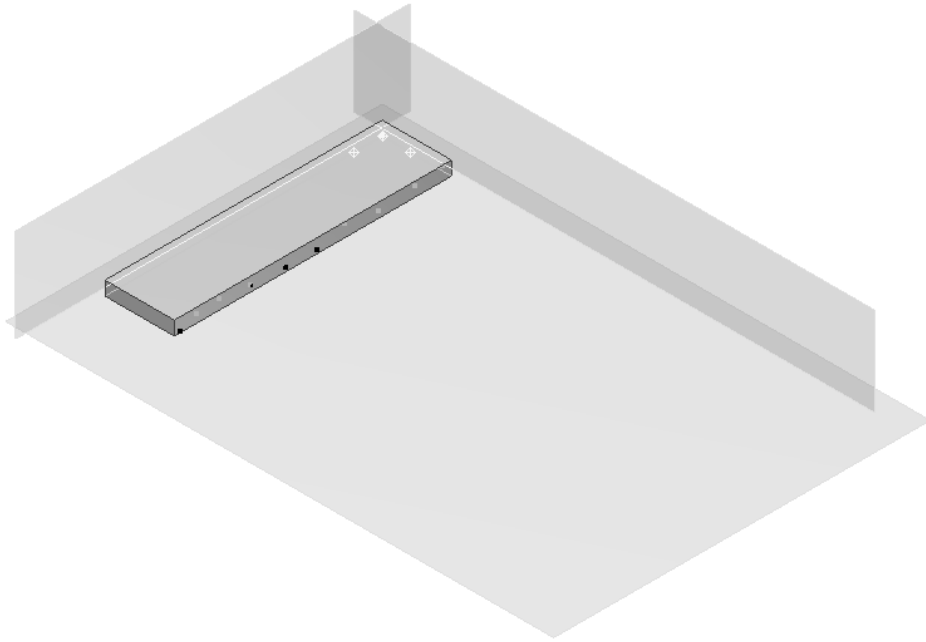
CMM inspection points in Autodesk Inventor.
